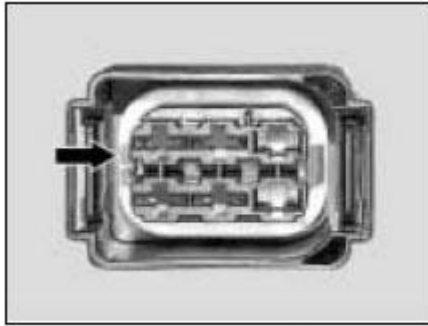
Pressing Spring Out - Shown On A 7-Pin JPT And SPT Coupling
